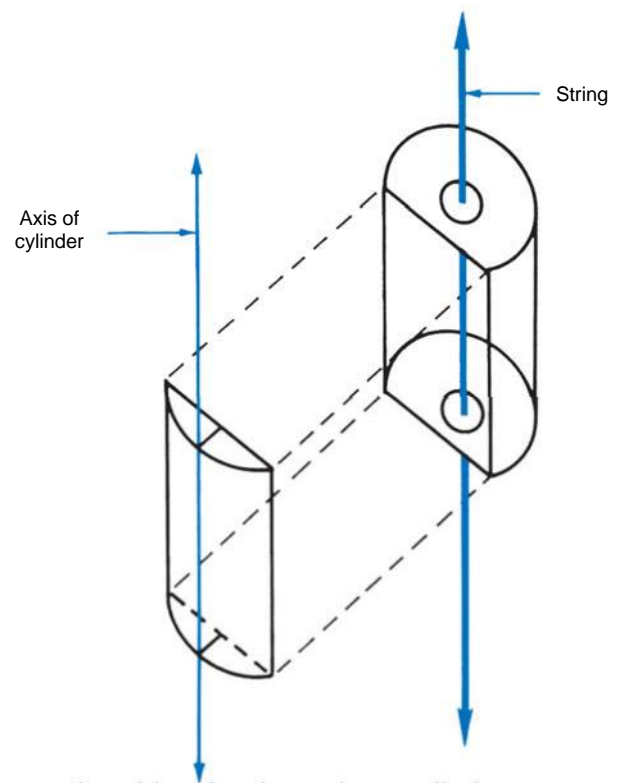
The axis of a cylinder is the reference for determining its orientation. The axis of a cylinder parallels an imaginary string running through the center of a cylindrical bead.
